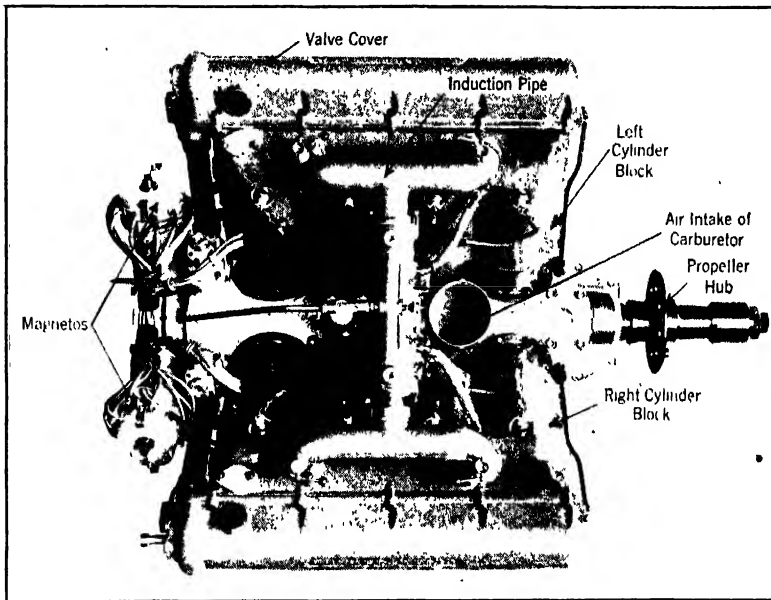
Top View of Wright "Tempest" E-4 Water-Cooled Engine Showing Carburetor and Induction Manifolding.
